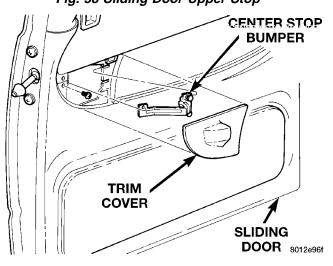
Sliding Door Center Stop Bumper INSTALLATION
